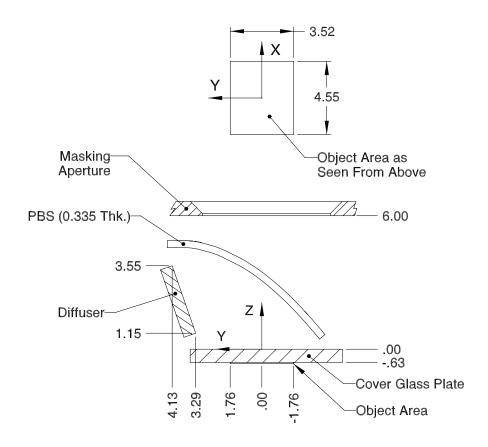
Optical Components In the Viewing Lens Object Space (All dimensions in millimeters)
